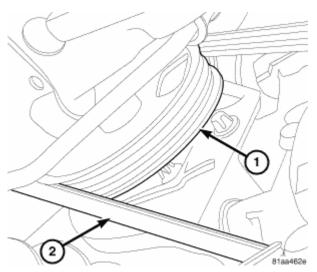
Removing/Installing Stretch To Fit Power Steering Belt Courtesy of CHRYSLER LLC
